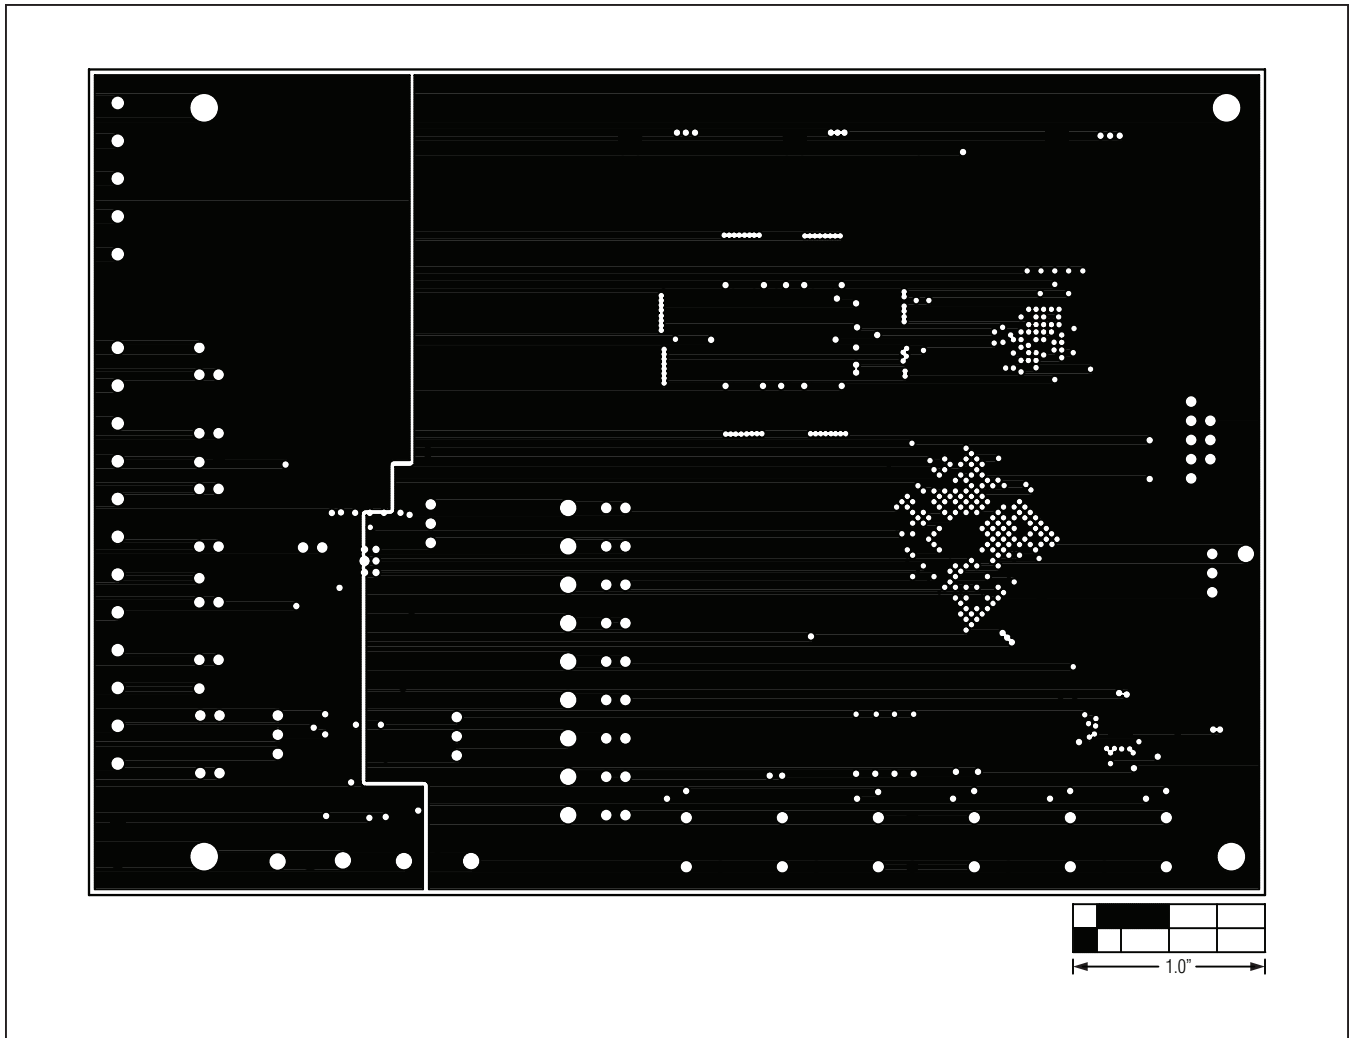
MAX11043 EV Kit PCB Layout—Ground Layer 8
